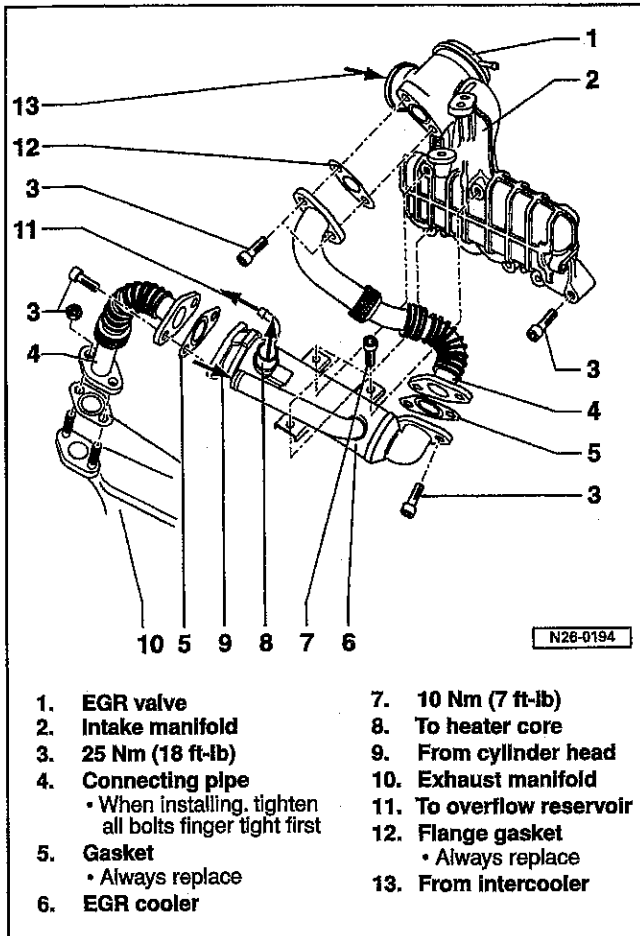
EGR valve, EGR cooler and related components for AHU TDI diesel engine.
